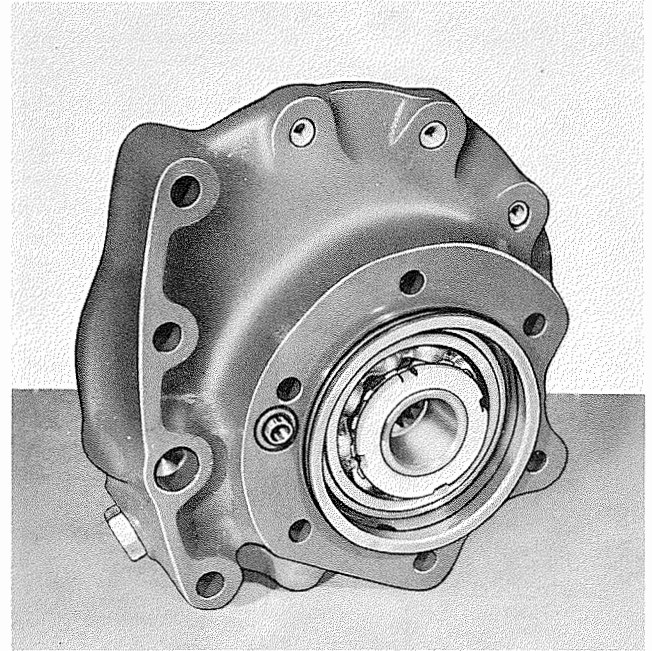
Front View of Gear Box Front Housing Showing Oil Seal Rings Installed
